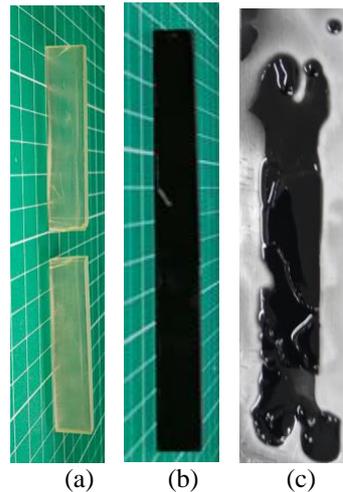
Photographs of 3D parts produced by SLA of pure resin shattered (a) resin with 0.3% of GNPs addition (b) and resin with 0.5% of GNPs addition.
